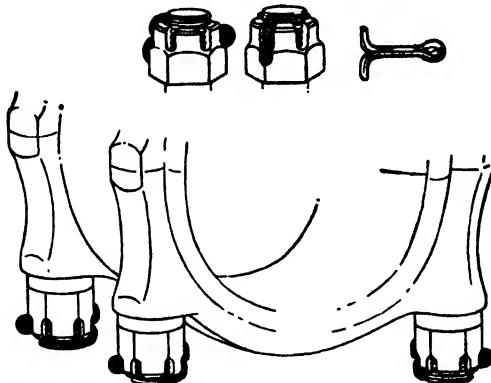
Correct Method of Fitting Split Pins to Connecting Rods.
